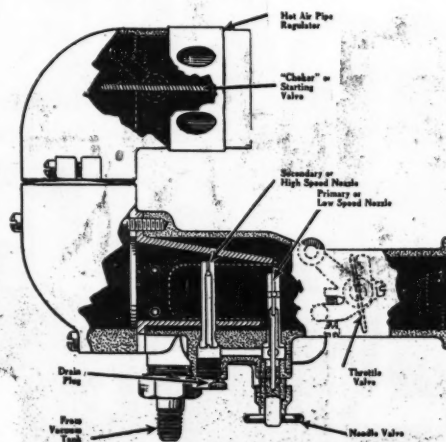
Tillotson carburetor, showing automatic adjustment of air valve
